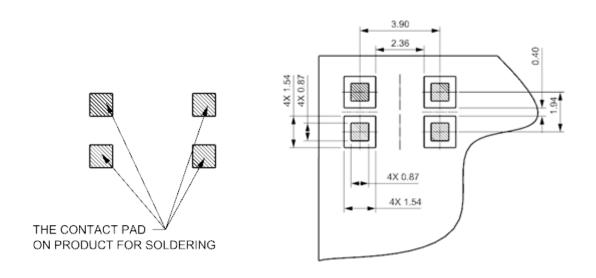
FOOTPRINT ON PCB FOR SOLDERING
